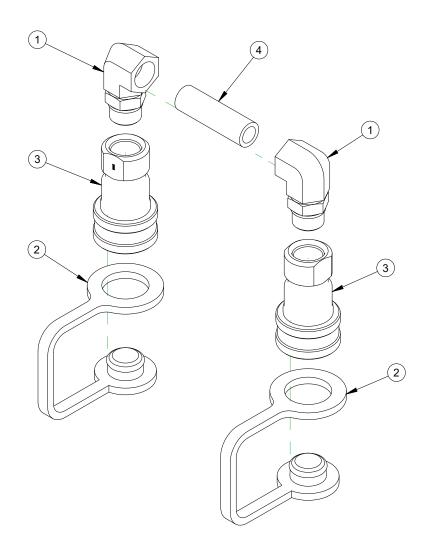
AIR CONTROL ASSEMBLY FOR PNEUMATIC FEED AND 1/2" (13 MM) DRIVE SUPPLY (P/N 87917)
